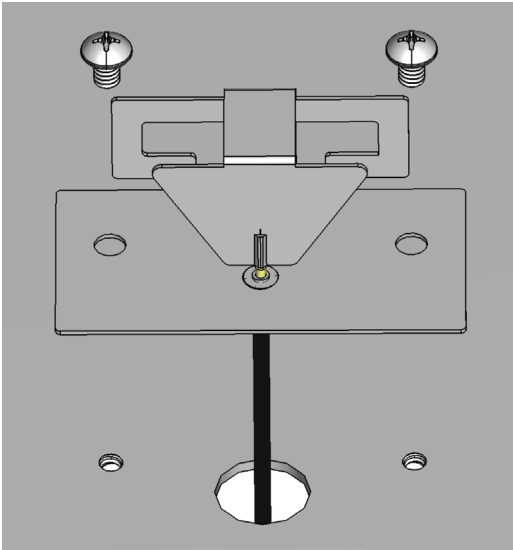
Exploded view of EMB-910003 and its associated mounting hardware.
